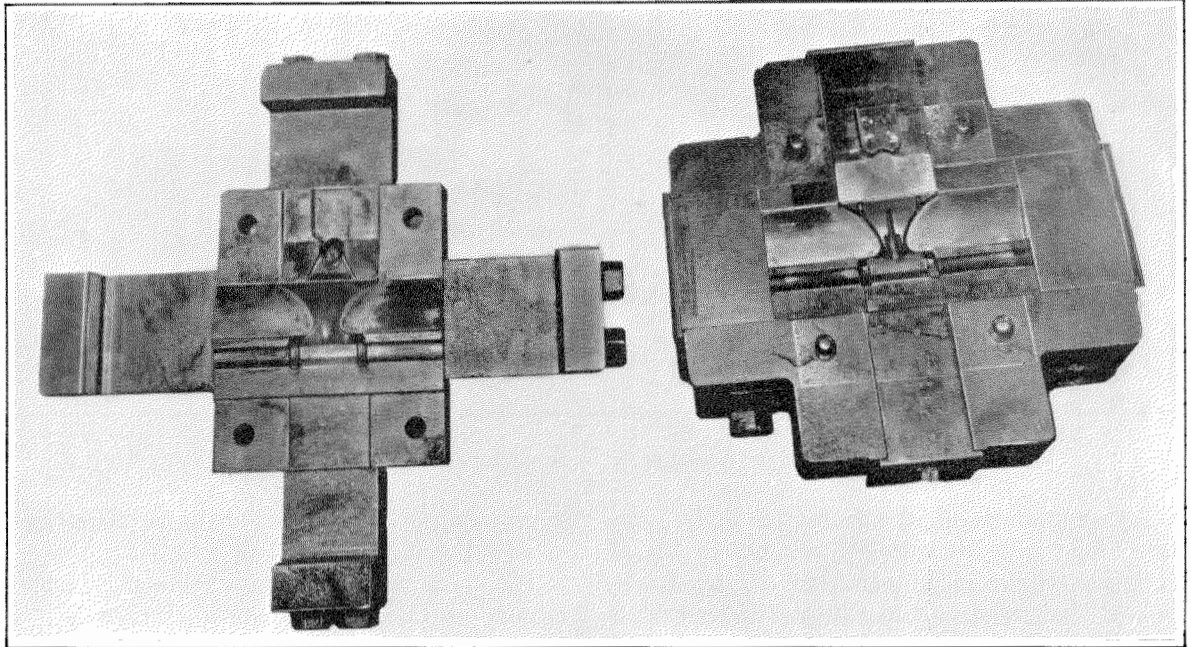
Mould for Subscriber Set Housing shown in Fig. 11.
